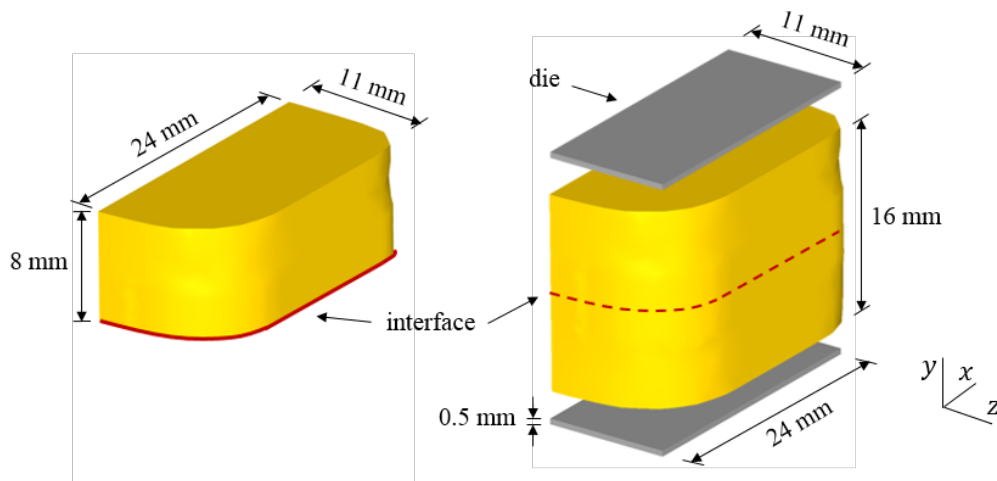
Dimensional details of the 3D purely thermal (left) and thermo-mechanical (right, exploded view) models.
